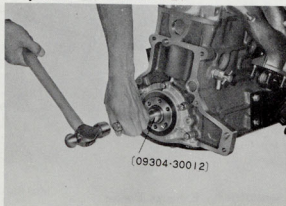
Installing Input Shaft Front Bearing W9151
